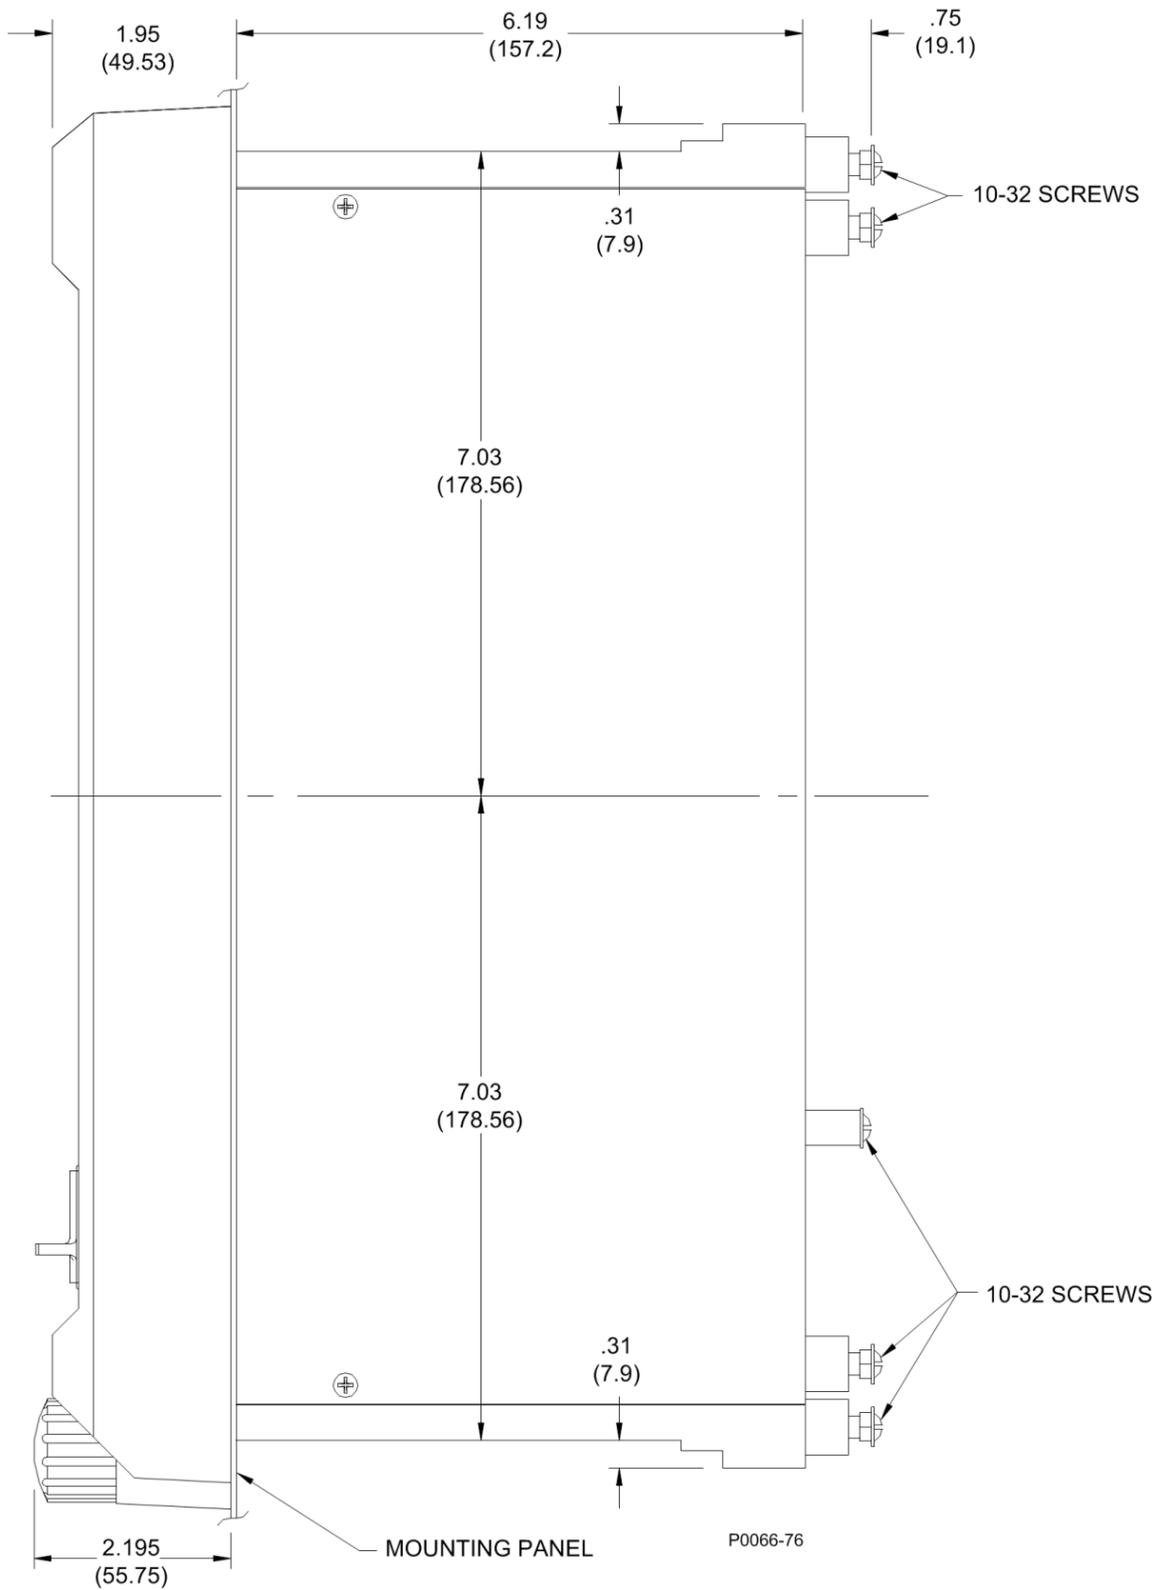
M1 Case Dimensions, Side View, Double Ended, Semi-Flush Mount
